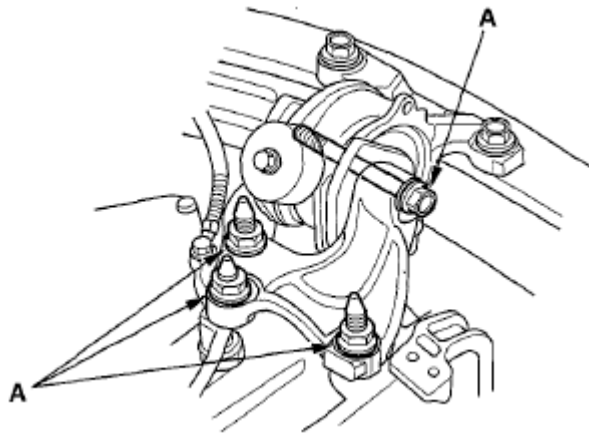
Identifying Transmission Mount Bracket Mounting Bolts & Nuts - M/T Model
